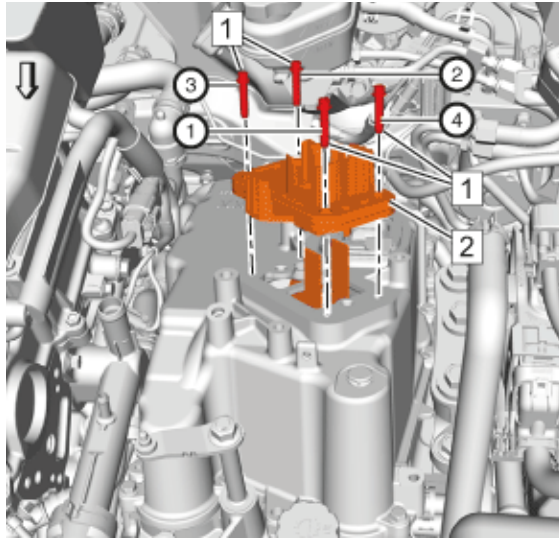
Drive Motor Battery Positive And Negative Cable Connector And Bolts (With Bolt Tightening Sequence)
